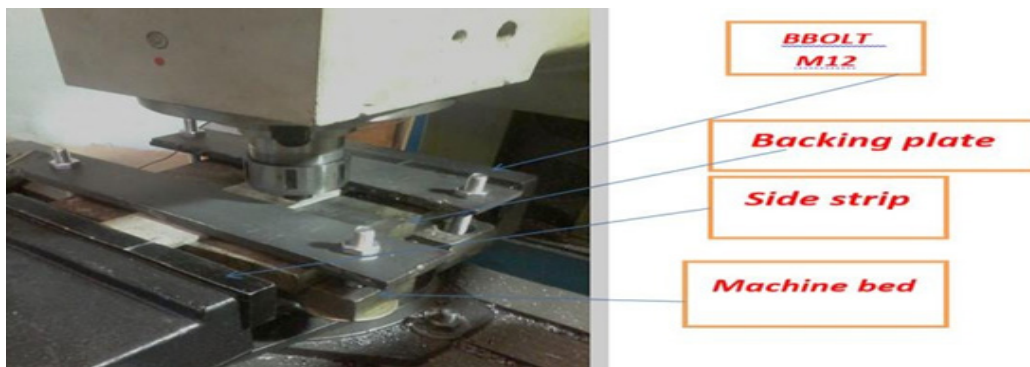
Experimental Setup of Friction Stir Welding process
